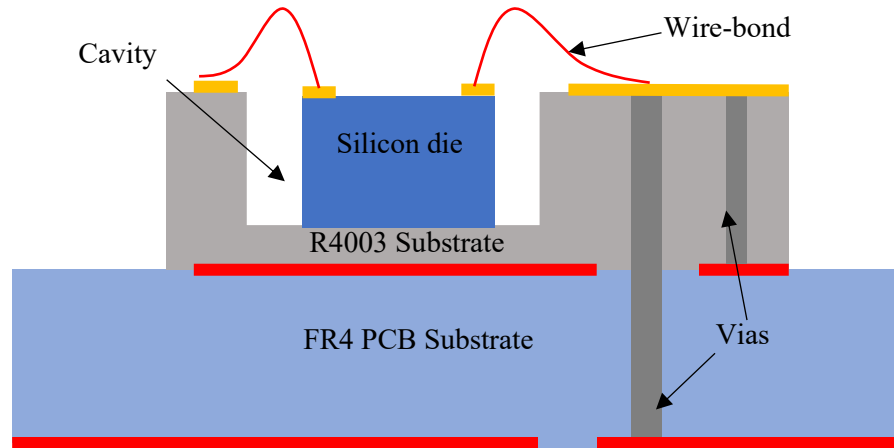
MMIC LNA-to-board assembly with the chip sunk in a cavity adapted from [64], © 2019 IEEE.
